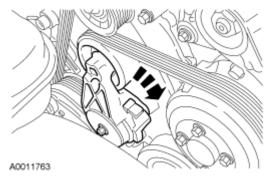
Rotating Tensioner Clockwise Courtesy of FORD MOTOR CO.
